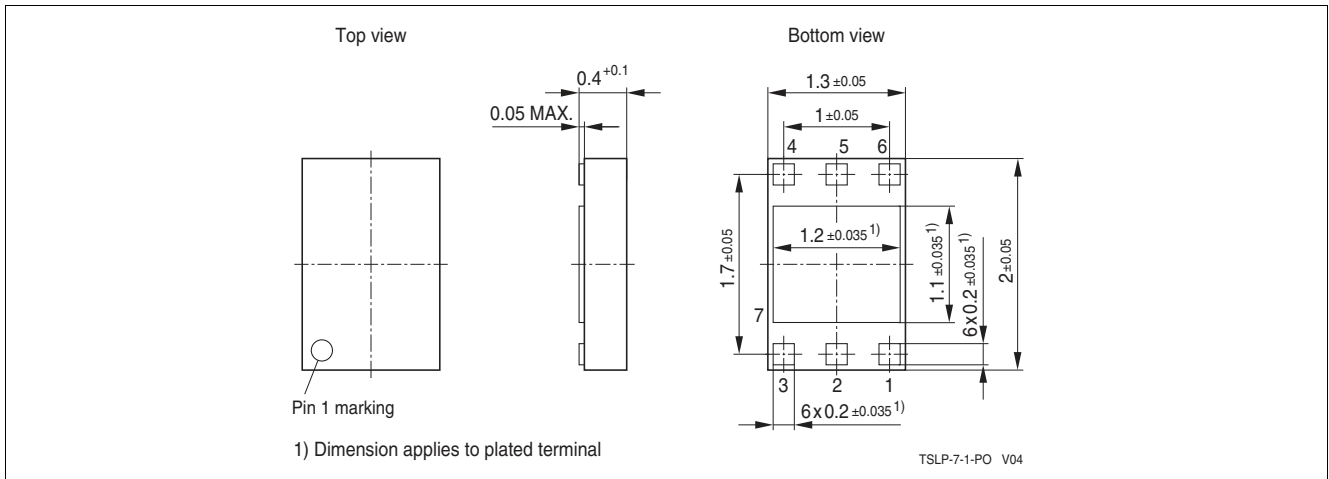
Package Outline TSLP-7-1 (side and bottom view)
